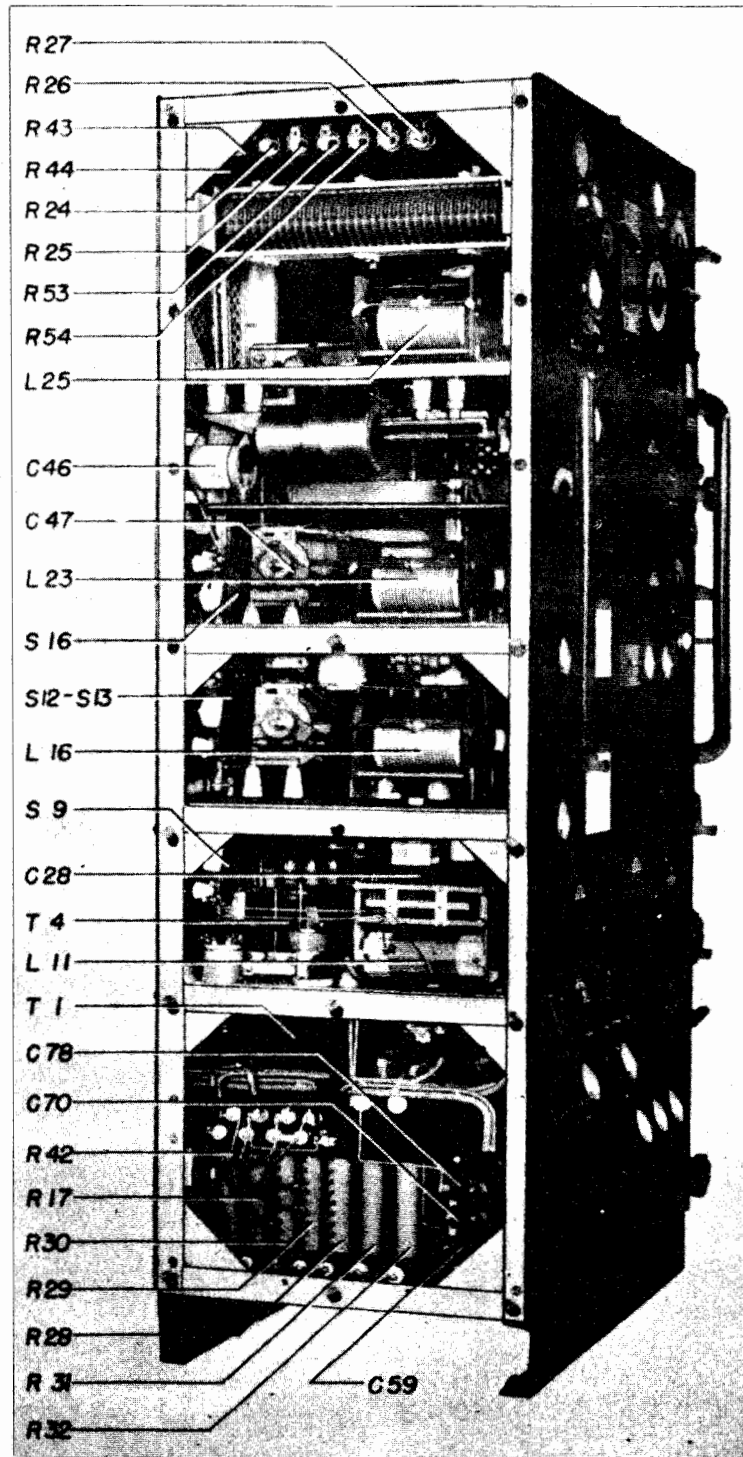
Transmitter Unit, TBL-Series for 115/230 V. D.C. Operation. Front Left Oblique, Shields Removed (Photo C-4462)
